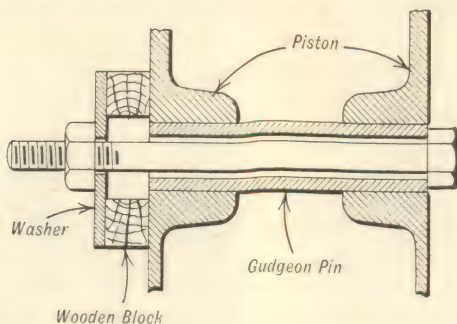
MAKESHIFT METHOD FOR REMOVING GUDGEON PIN
